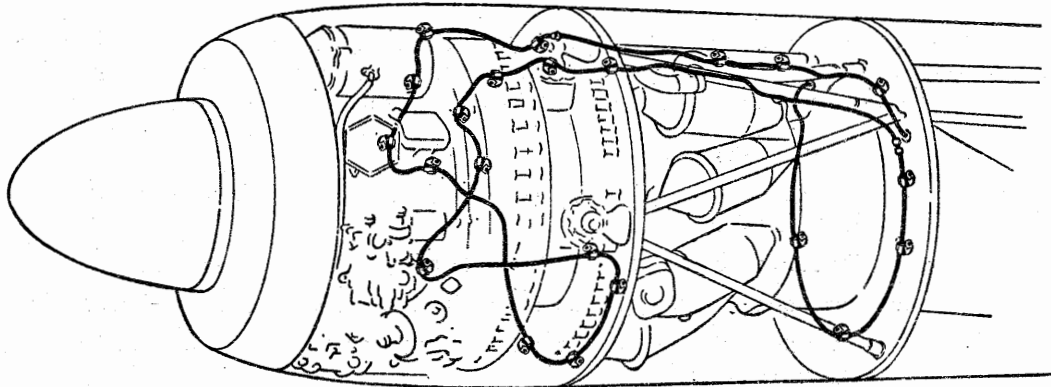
TYPICAL CONTINUOUS ELEMENT INSTALLATION
